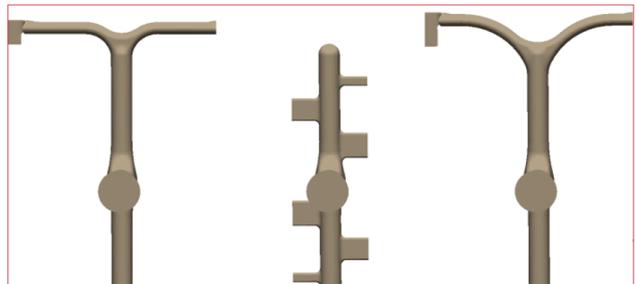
1 cavity casting process product of track shoe parts for super-large excavator caterpillar
